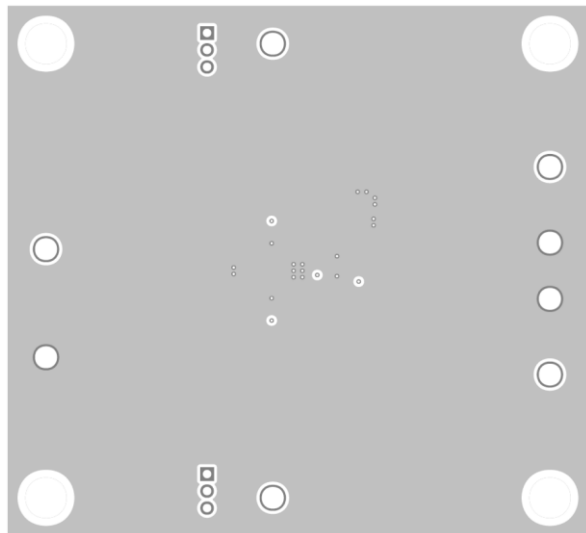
EVAL-ADPL31613-AZ PCB Layout—Top View
